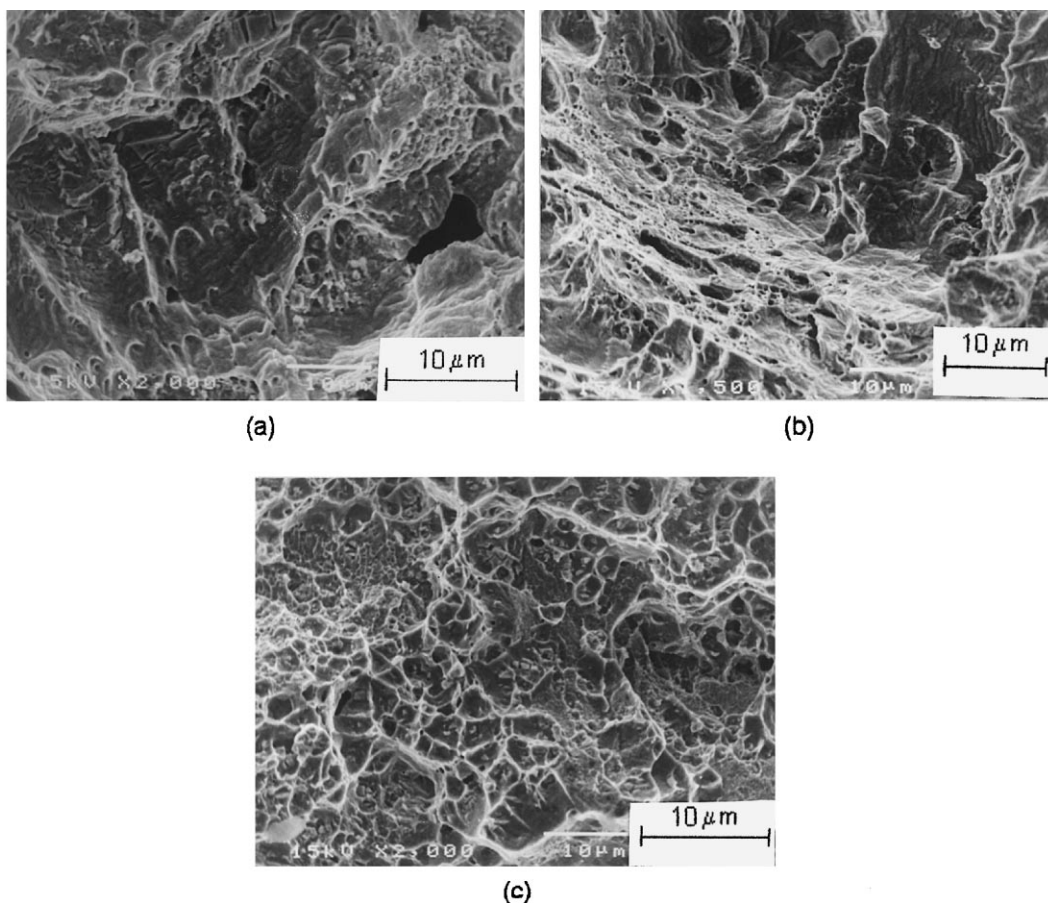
SEM fractographs of fractured Charpy impact specimens: (a) aged 316 weld metal, (b) aged 16-8-2 weld metal, and (c) aged Inconel 182 weld metal.
